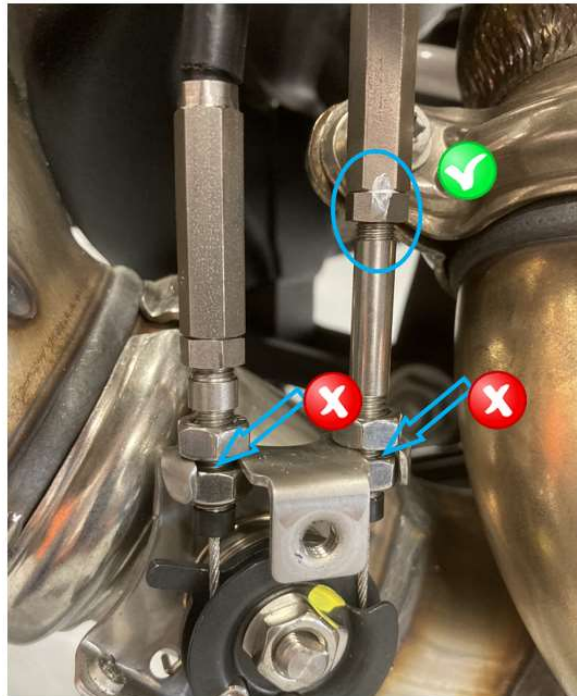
Adjusting screw with wrench size 8 mm for cable tension
